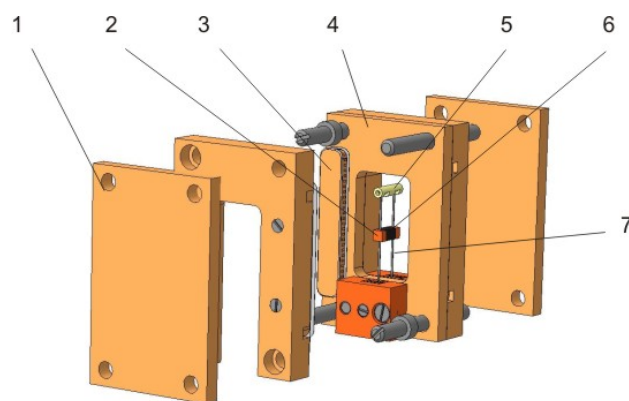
Sample arrangement in the holder. 1 – Thermostat cover, 2 – probe pads, 3 – heating element, 4 – thermostat base, 5 – ceramic screed, 6 – TEM sample, 7 – probe rack.
